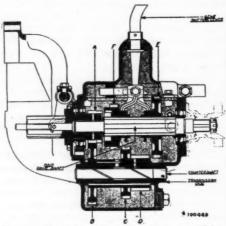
Drawing of transmission assembly, Model 348 Oakland
